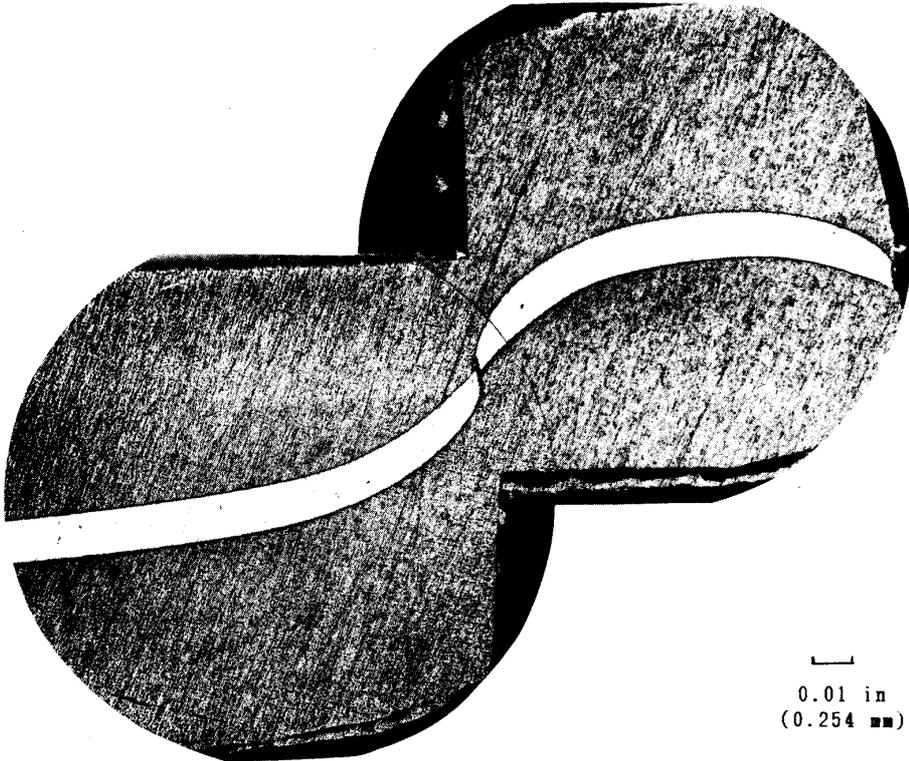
Al-clad SS Half-Way Specimen Section
